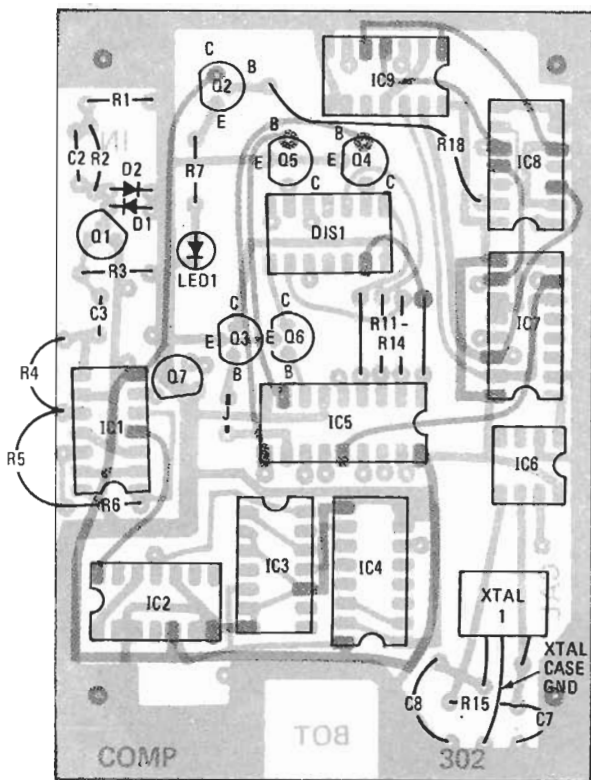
PARTS PLACEMENT DIAGRAM shows exactly where all the parts mount on the topside of the circuit board. Diagram also shows how the two foil patterns overlap. View is from the top side of the circuit board with the bottom foil pattern shown in the lighter shade of grey.
